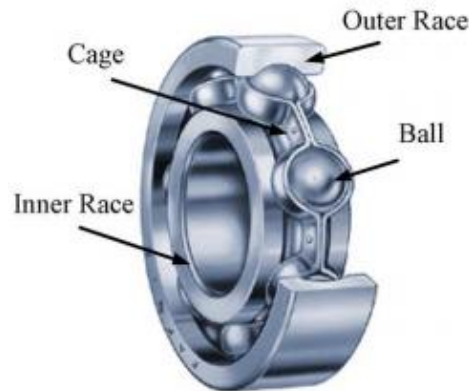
Schematic diagram of a rolling-element bearing [72]
